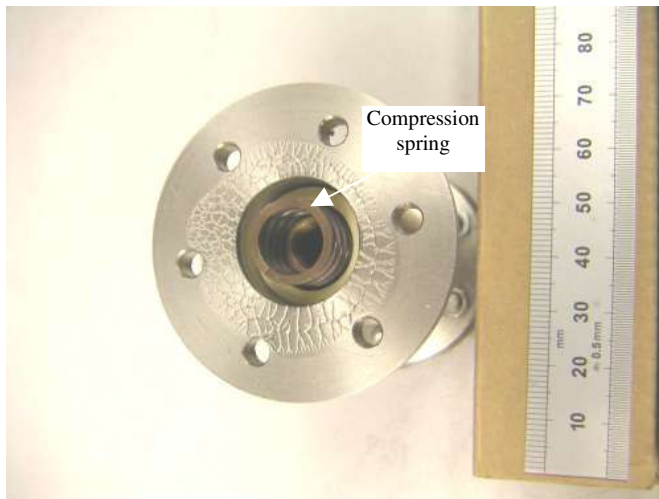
Resistojet upstream end, part assembled, showing sealant on flange plate
